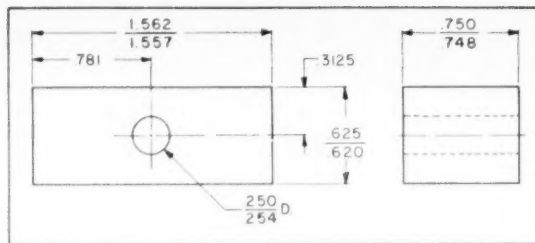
The limiting dimensions shown in Fig. 4 can also be expressed as indicated here. The dimension lines should not pass through dimension figures.
